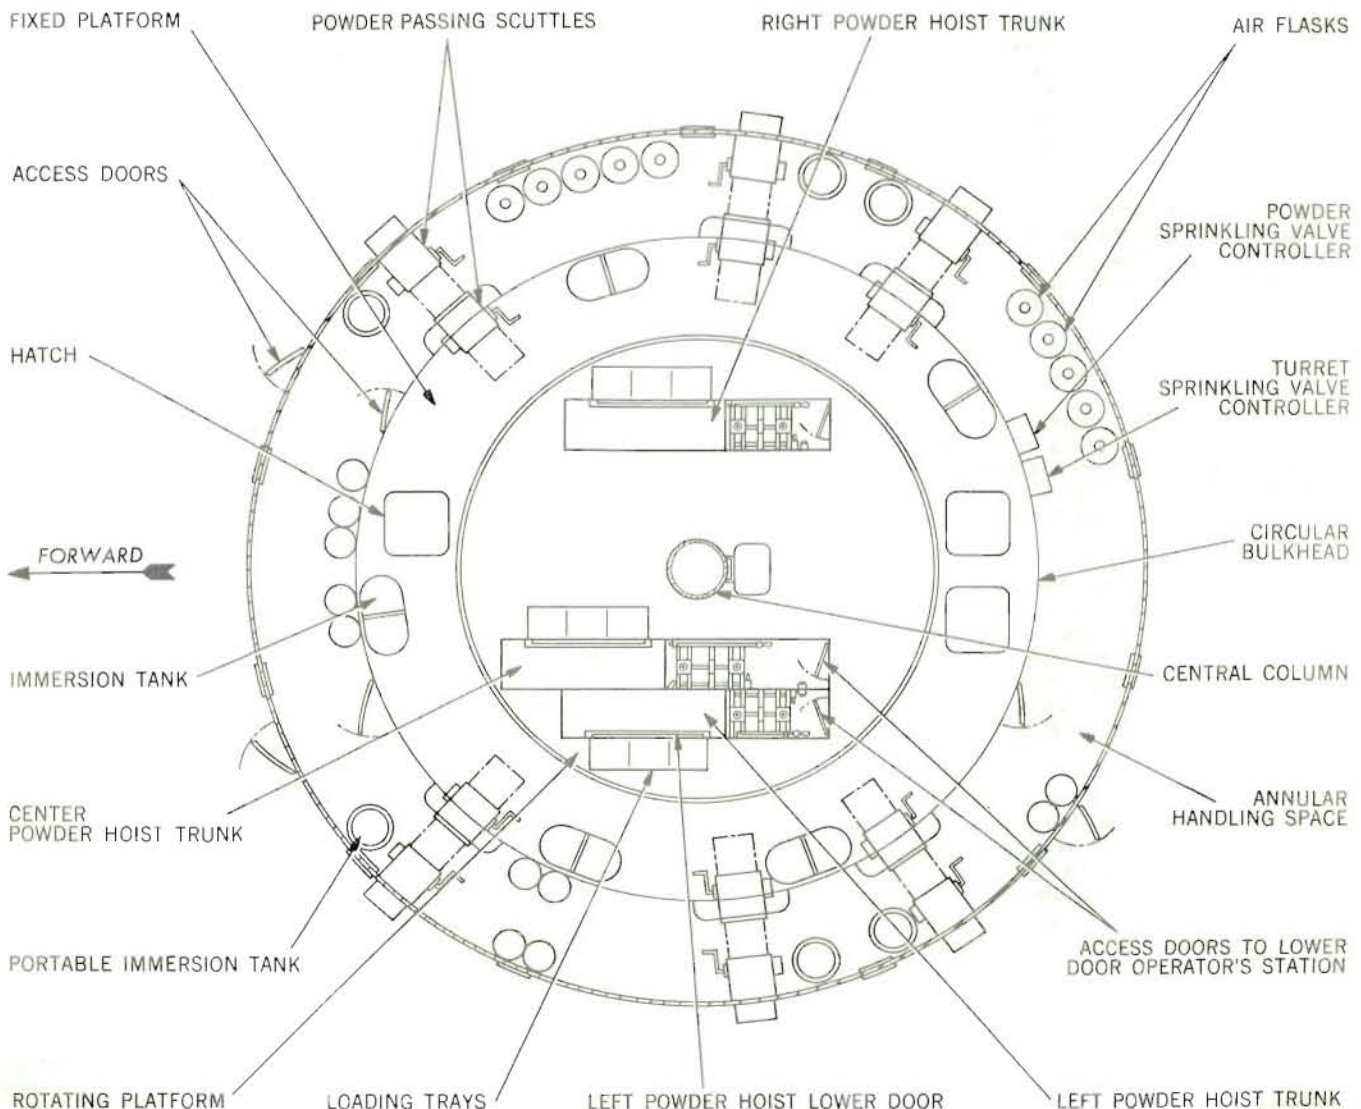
Ordnance Equipment on Powder Handling Flat - General Arrangement - Plan
